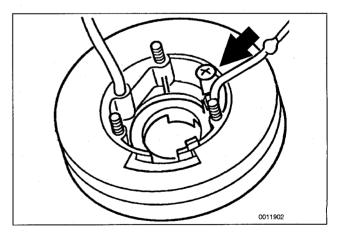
Airbag contact ring locking screw (arrow), as installed on new replacement part from BMW (early production cars).
